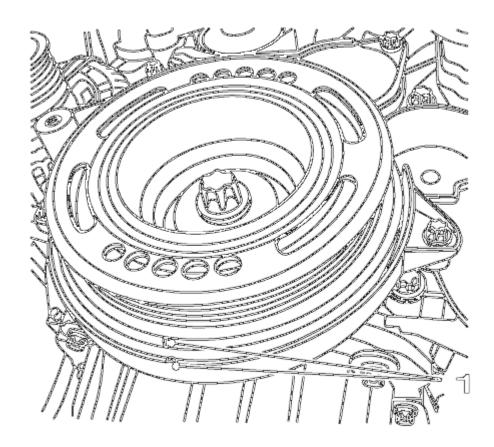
View Of Crankshaft TDC Position Courtesy of GENERAL MOTORS CORP.
